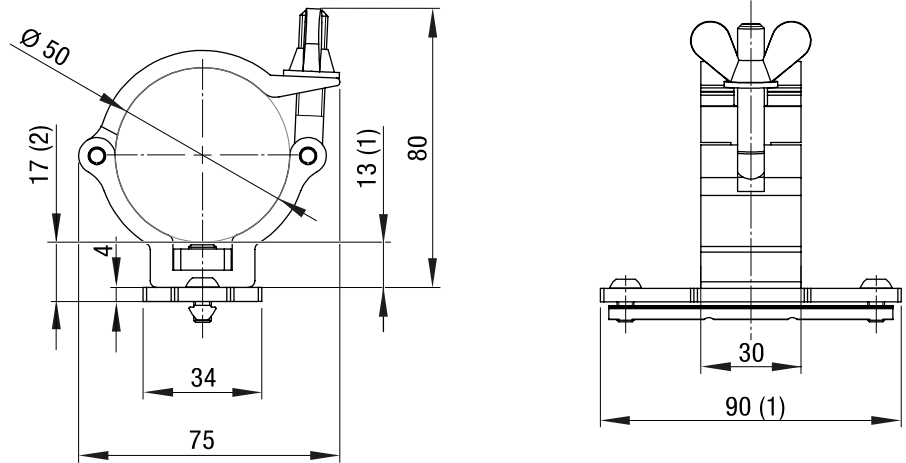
Half-coupler – Installation dimensions depending on mounting variant
